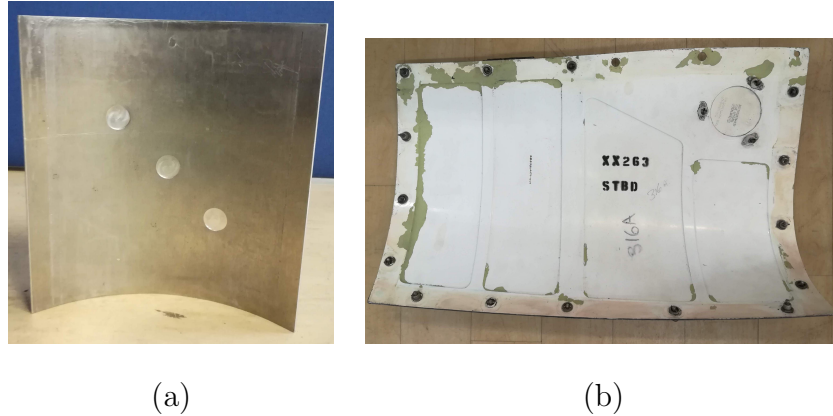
Rear faces of (a) specimen 9 and (b) specimen 10.
